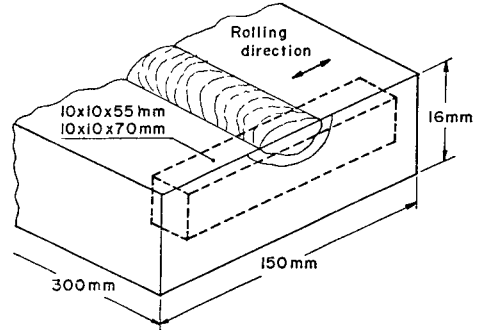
Welding plate configuration for the 1st specimens
